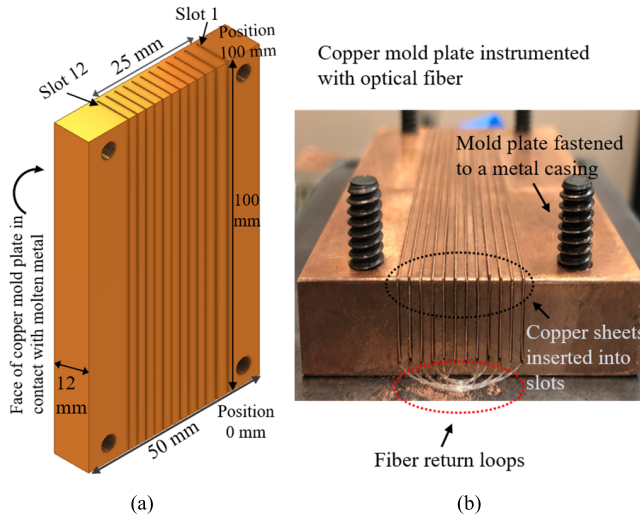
Schematic of the EDM-machined copper mold plate and photograph of the same after instrumentation with an optical fiber. (a) Schematic of the copper mold plate (100 mm × 50 mm × 12 mm) used in the dip test. Twelve slots, each 350 μm wide, were machined from the back face of the mold plate to within 1 mm of the front face. (b) Photograph of the instrumented mold plate. The slots on the copper mold plate were instrumented with a single continuous optical fiber configured with multiple return loops at both ends of the mold plate. The slots were backfilled with copper powder and copper sheets. The mold plate was fastened to a metal casing.
